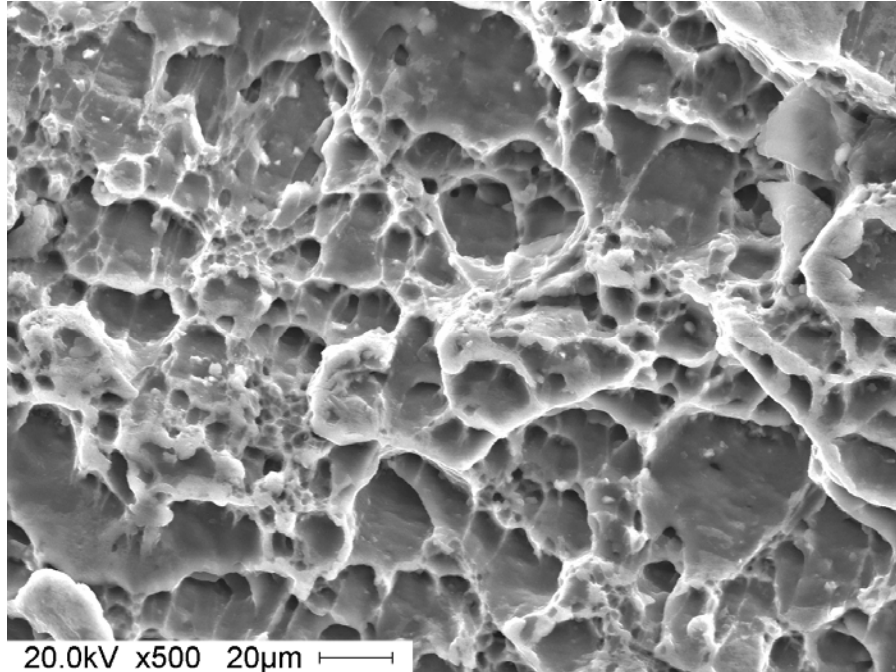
Scanning electron microscope view of the burst fracture surface, which was indicative of ductile overload. Magnification: x500.
